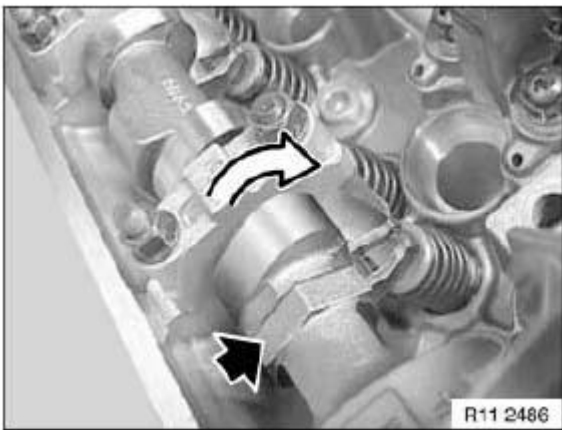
Identifying Central Bolt Rotation To 45° Before TDC Position
